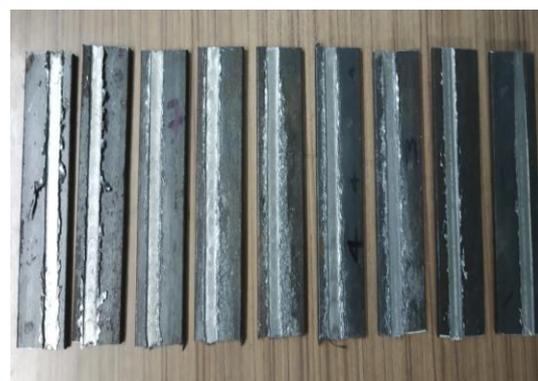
Machined specimens at constant cutting conditions from L9 DOE
